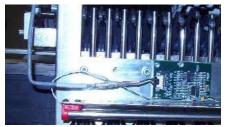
Threadbreak Harness Connected to Sensor PCB
